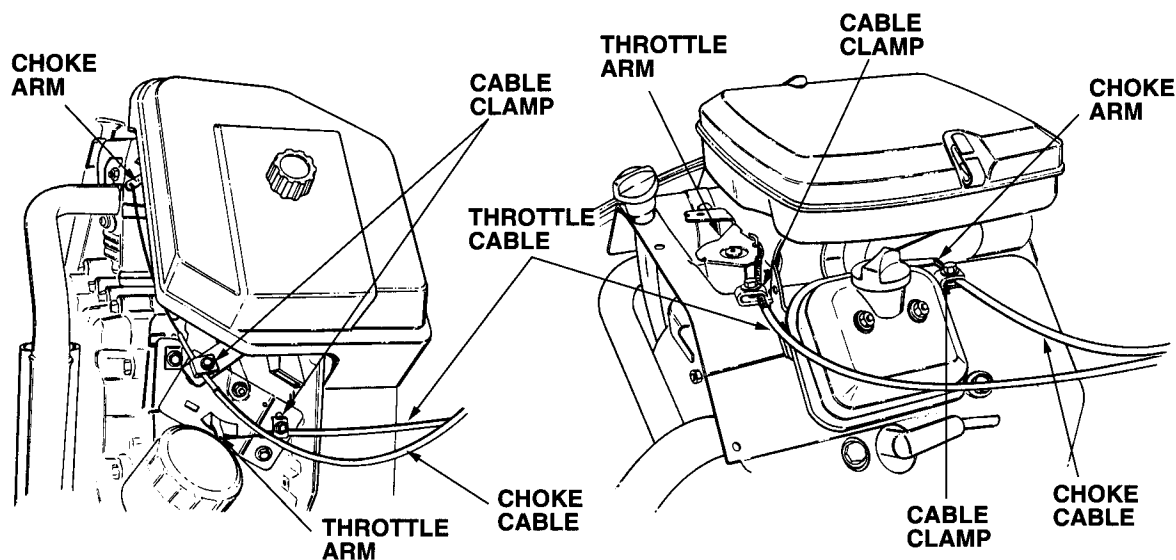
Throttle and Choke Cable Connections (Models 2130, 2135, 2160 And 2165 Shown).
